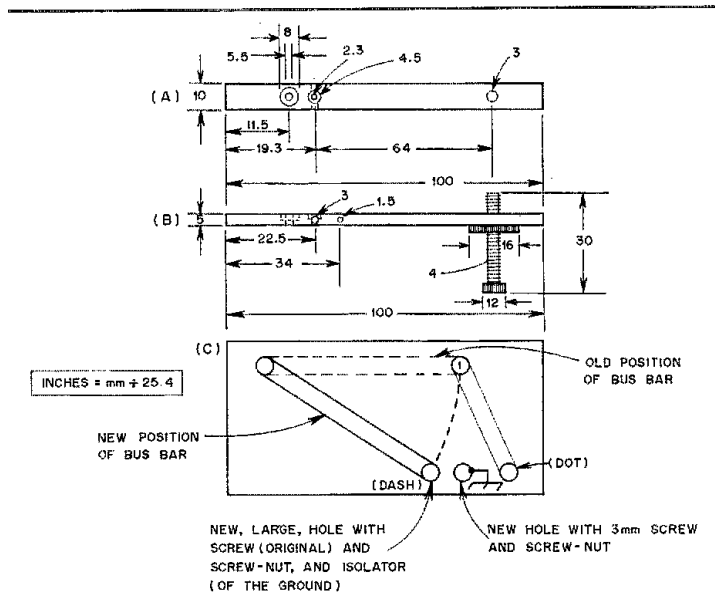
These simple modifications are for converting a Vibroplex-type key into a paddle for use with an electronic keyer. Dimensions for the new bar required for this modification are shown in A and B. On the bottom of the key the bus bar shown in heavy lines is moved to the position indicated. The output terminals are at the lower right in the drawing at C. Holes for the original terminals may have to be enlarged to accommodate insulating sleeves, which can be made from plastic tubing or other material. A new hole must be made for the ground connection. Measurements are in millimeters.
